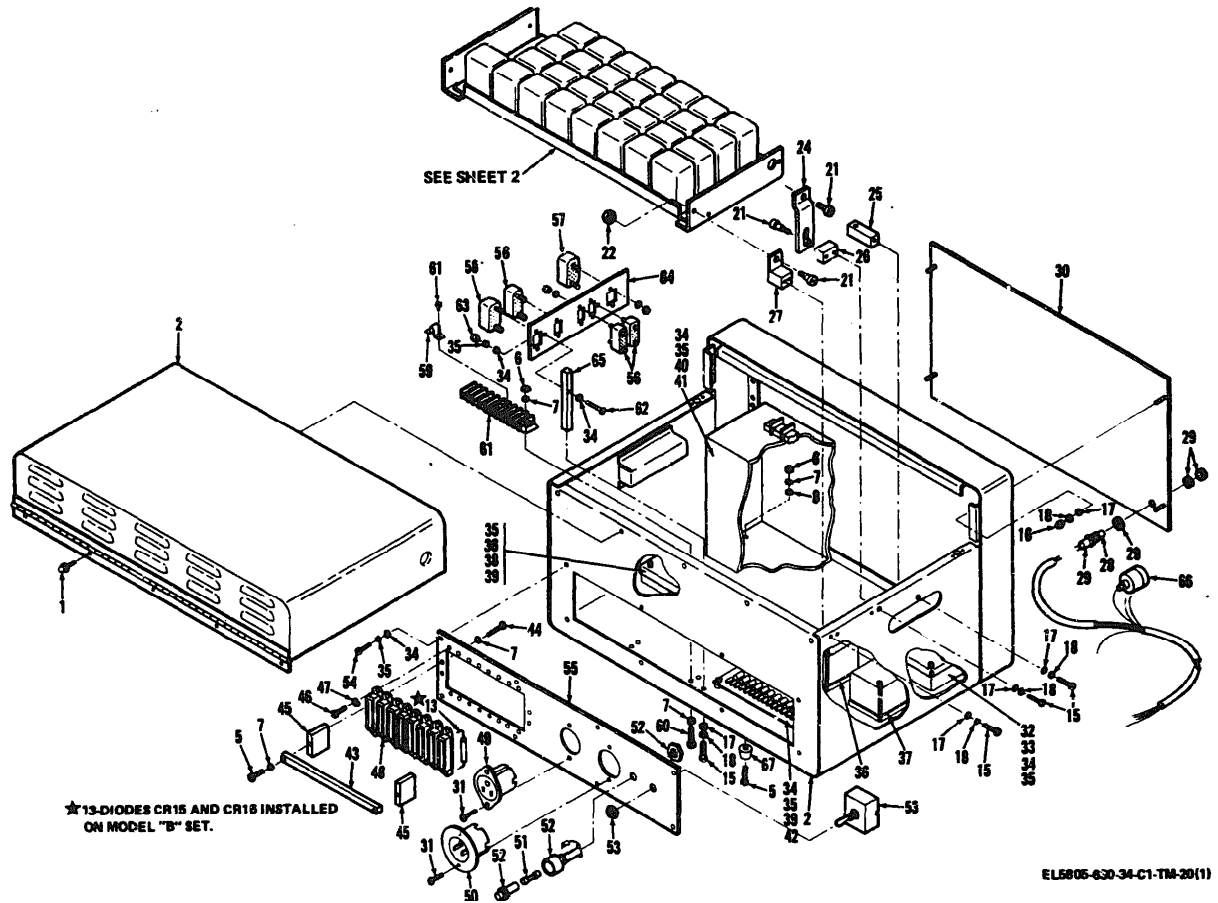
① . . Call director system logic set CD-134-43A and CD-134-43B, exploded view, sheet 1 of 2.
